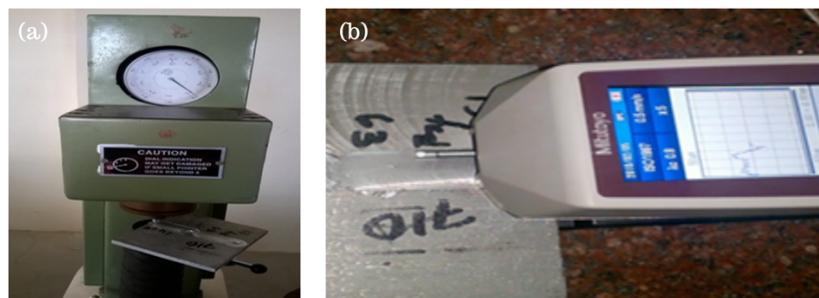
Laboratory equipment used for testing of FSW specimen: (a) Rockwell hardness testing machine; (b) surface profilometer.
